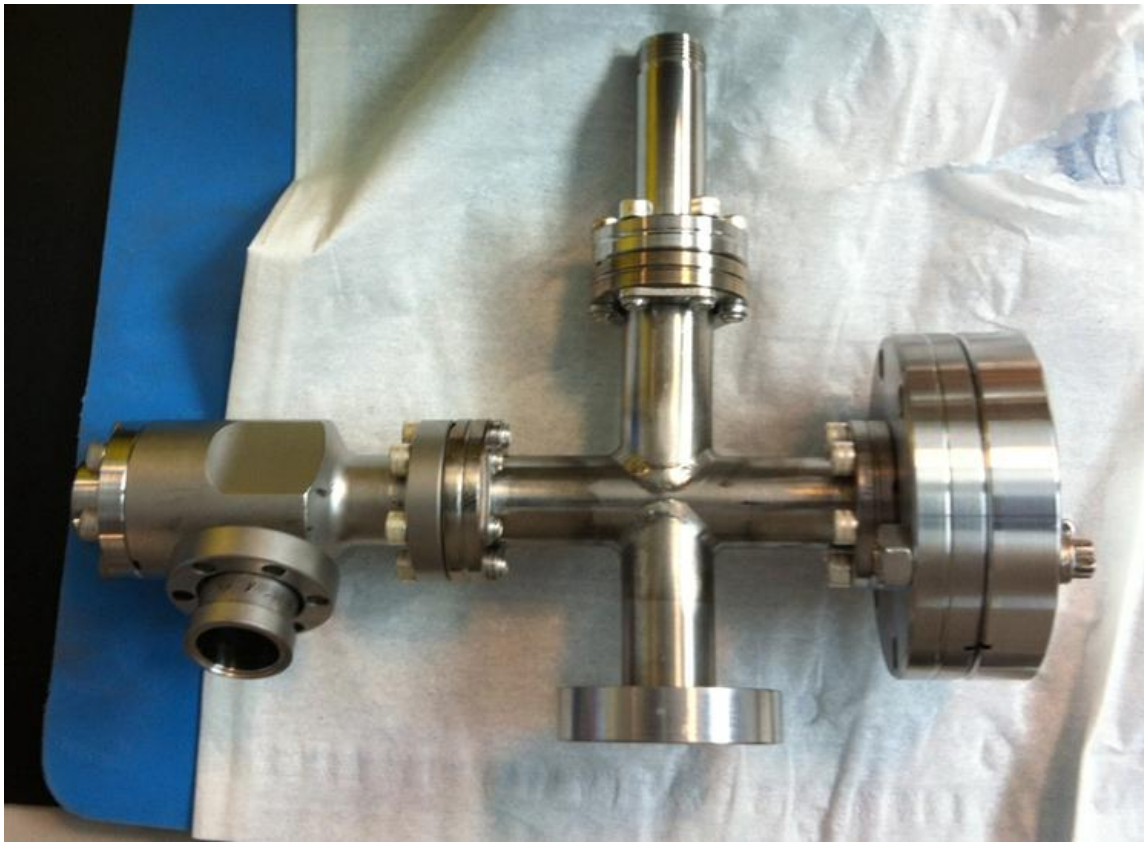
4 Way Adapter With Vacuum Valve (Left Arm), Type-N RF Feed-Through (Top), Space For Blow Out Disc (Right Arm) and Cavity Flange (Bottom)
